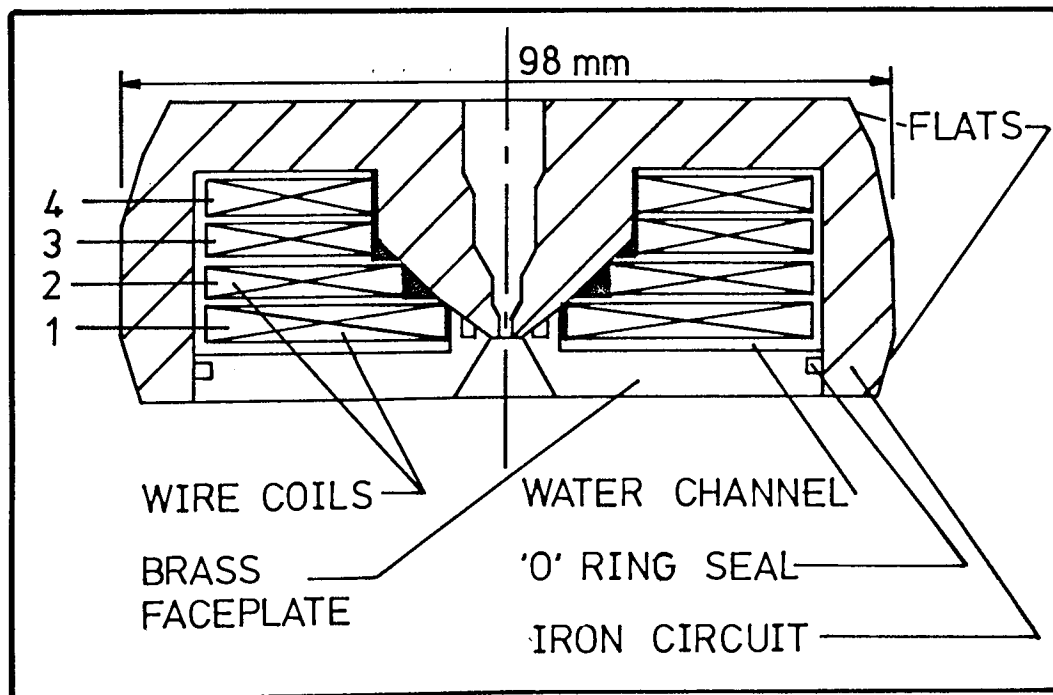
Miniature 1 million volt projector lens modified for wire windings. Full size. Bore diameter = 2.25 mm.
